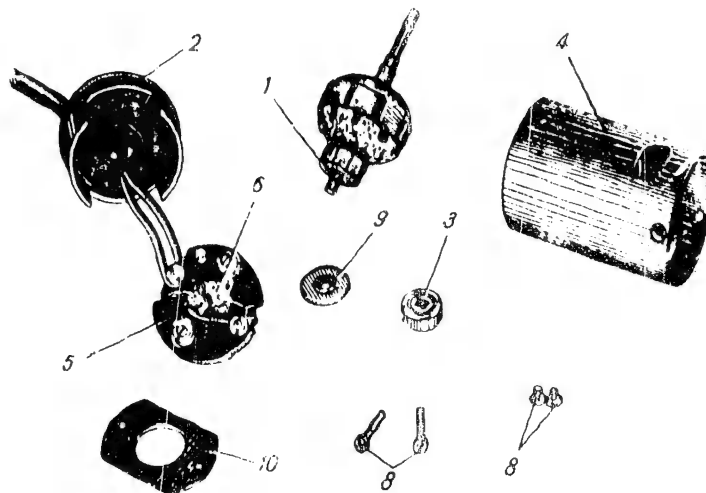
ELECTRIC MOTOR JP-3.5M (DISASSEMBLED)
